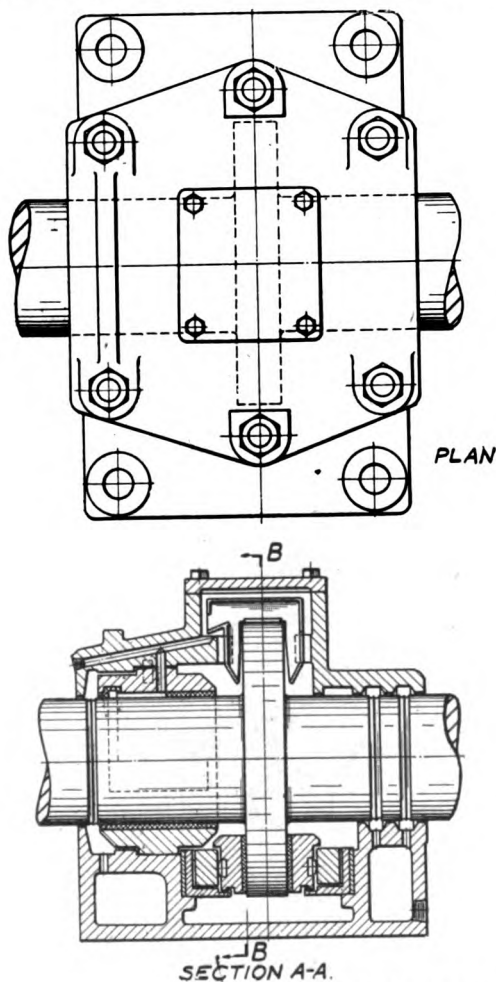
Section of thrust-bearing for direct-reversible engine with clutch
